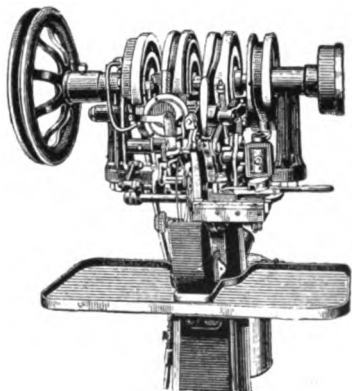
GOODYEAR STITCHING MACHINE. This is one of the machines in what is termed the Goodyear welt system.
